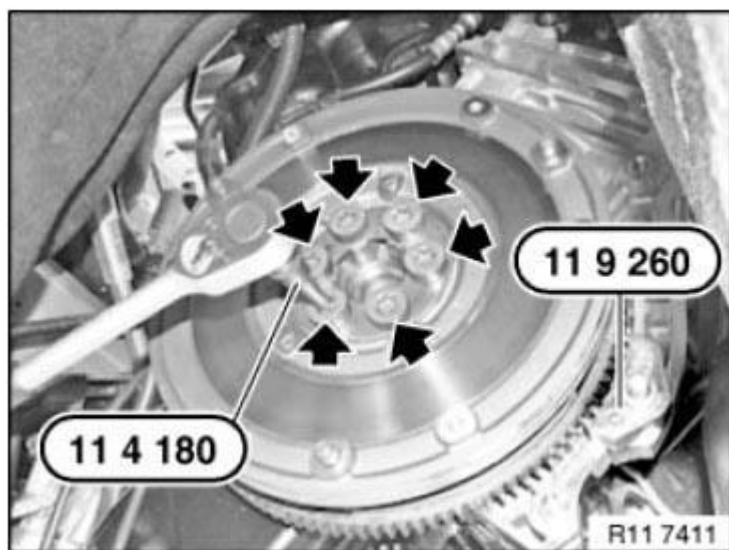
Removing Flywheel Bolts Using Special Tool 11 4 180
